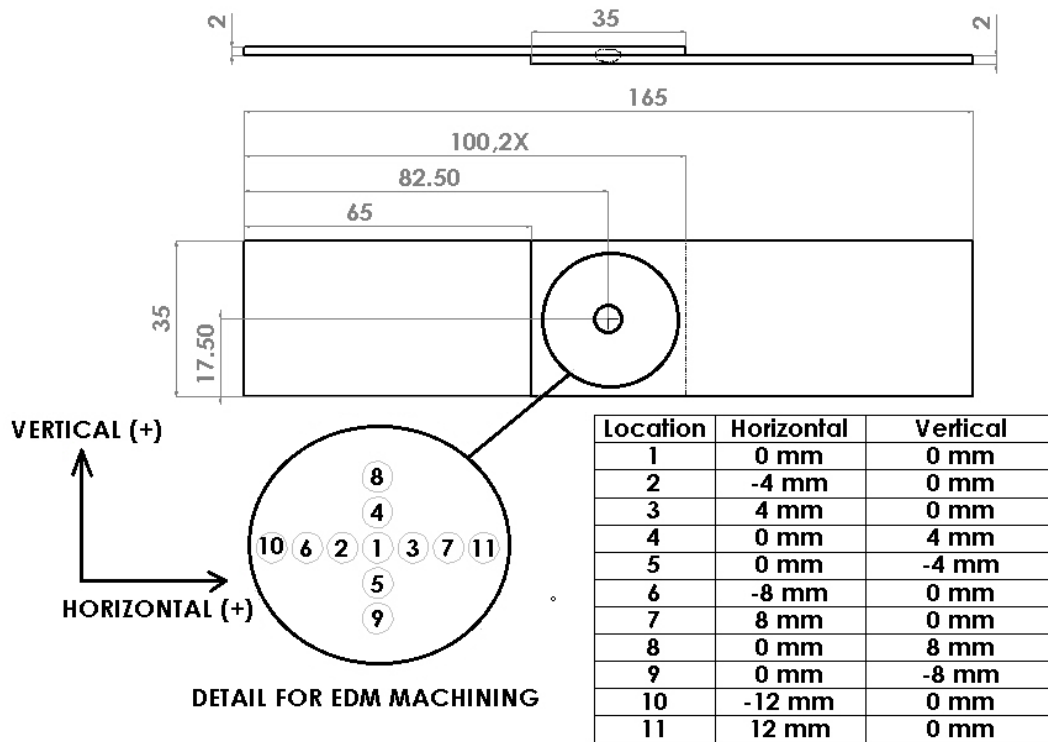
Geometry of Al 6061-T6 resistance spot welded lap-shear coupon
